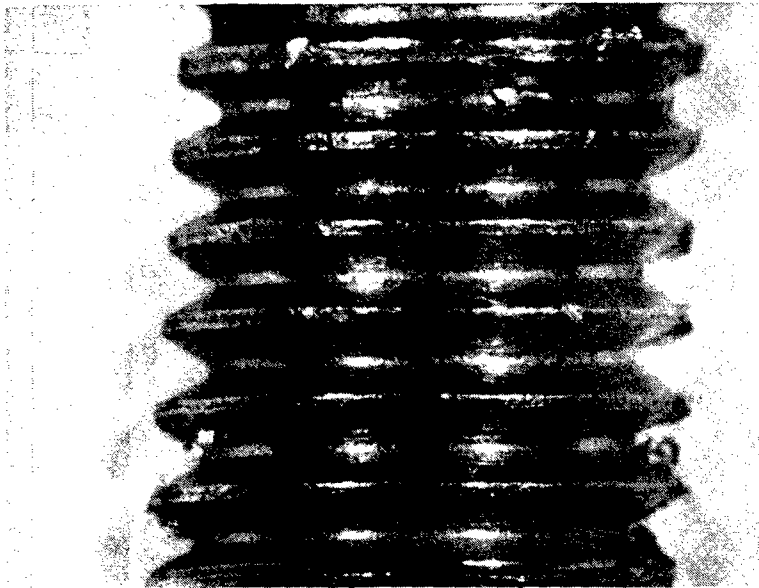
Rolled threads on bolt. Arrows mark defects. Mag: 8x
